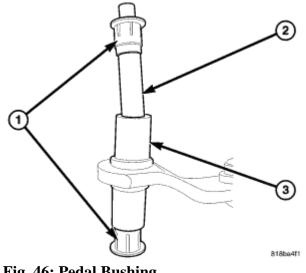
Pedal Bushing Courtesy of CHRYSLER LLC
